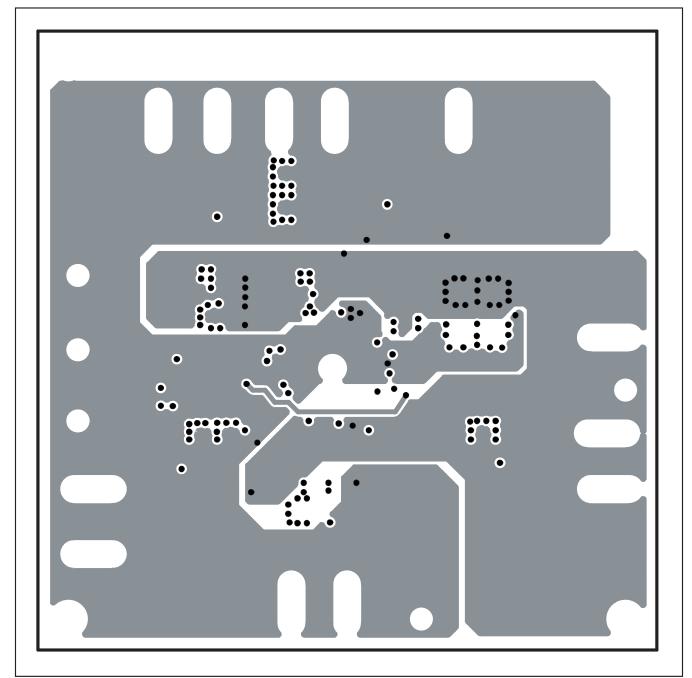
MAX8858 EV Kit PCB Layout—VSU/VBATT Layer 3
